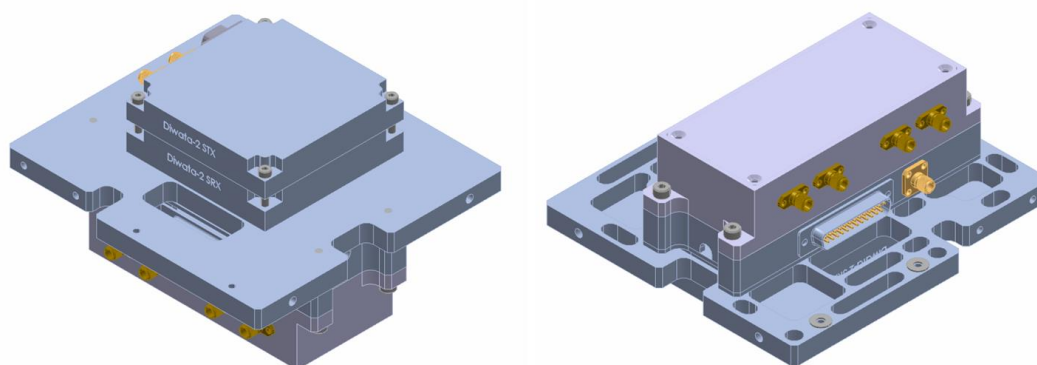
Mounting panel with electronic component assembly: top (left) and bottom (right) view.
